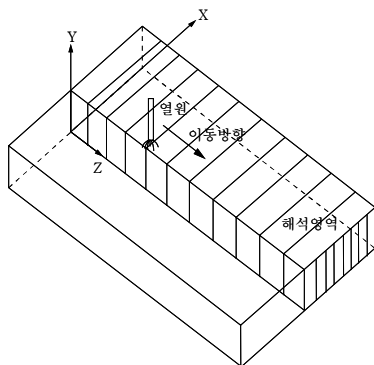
Solution domain of 3-dimensional analysis in bead-on-plate GTA welding
